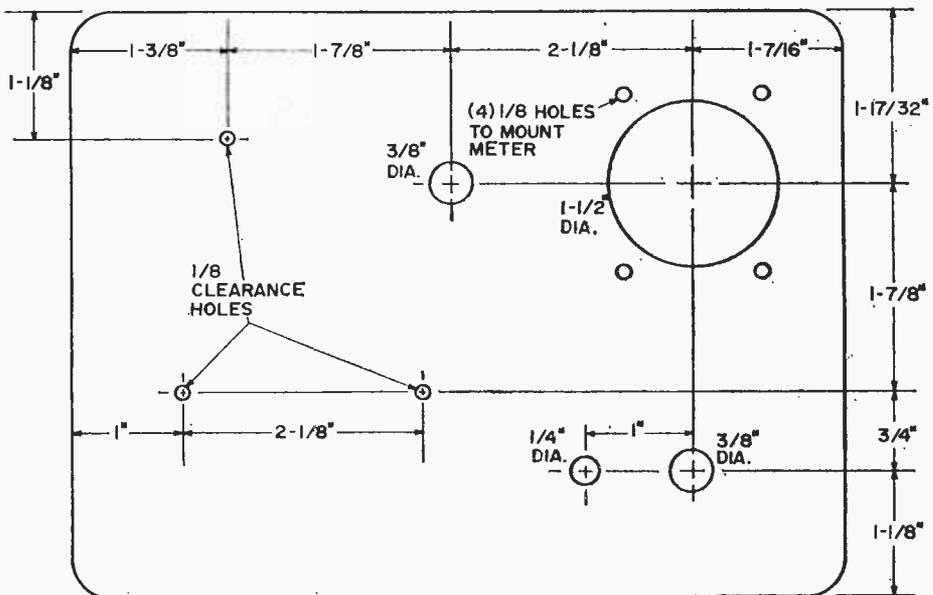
(above) information for drilling the box to house the transmitter circuit card battery and power switch. Card is raised above bottom by extra nuts on mounting bolts. Complete receiver is mounted on its box cover. Drilling details are shown below. Opposite page (center), Fig. 6 details drilling and mounting details for receiver. Note hinged mount for receiver box. This allows receiver loop to be oriented to null the receiver before starting search.
